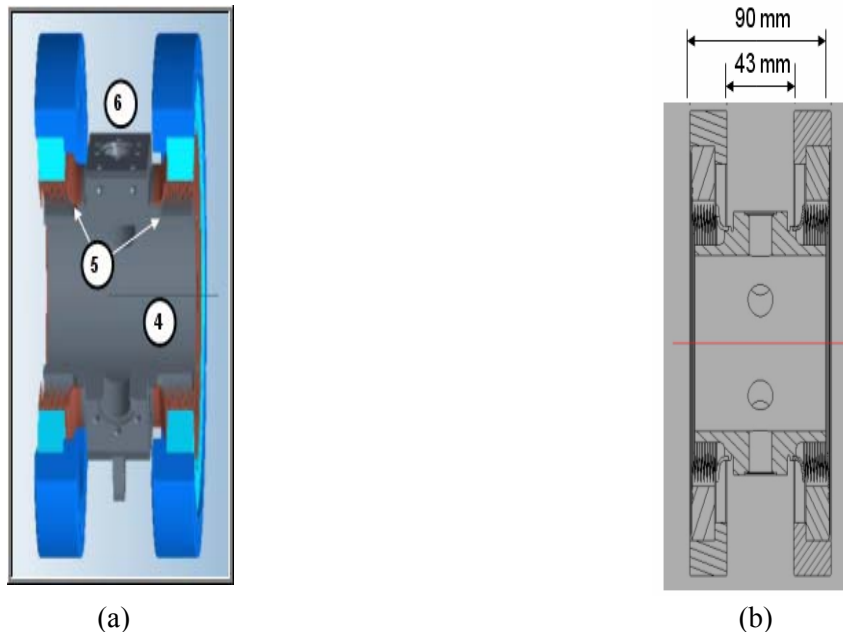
Pinhole bellows assembly, (a) main components, (b) cross section view.
